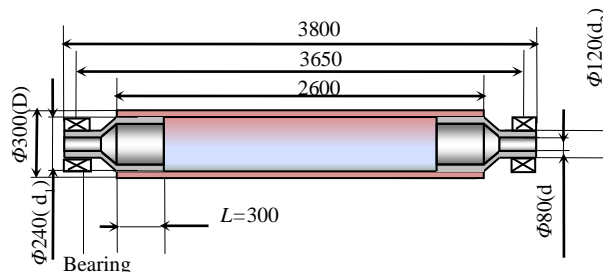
Structure and dimensions of a real ceramic roller model (mm) (3D)
